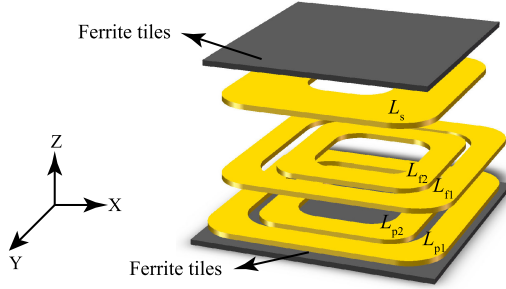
Exploded view of the coil arrangement featuring field enhancement.
